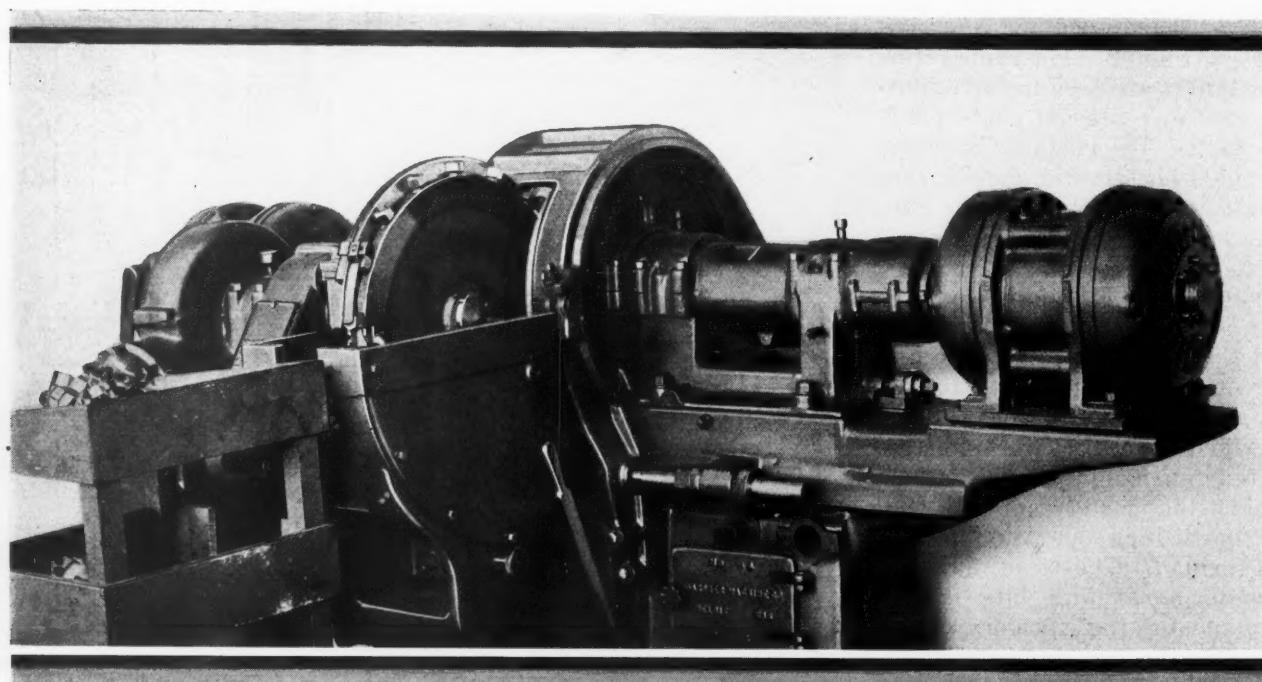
Machine that Grinds All Six Sides of Hexagonal Nuts in One Loading and Three Passes between the Abrasive Members
